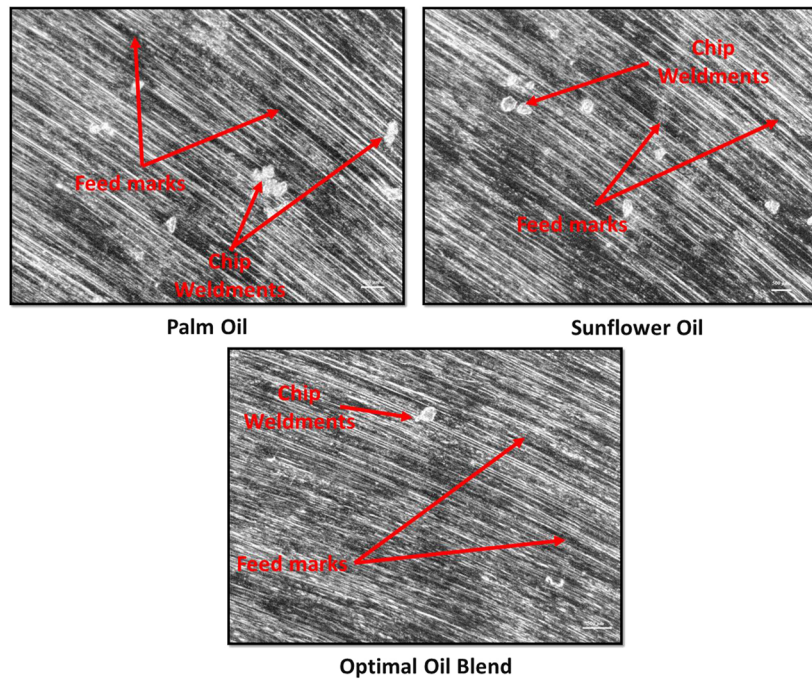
Microscopic images of the machined surfaces using different lubricating oils.
